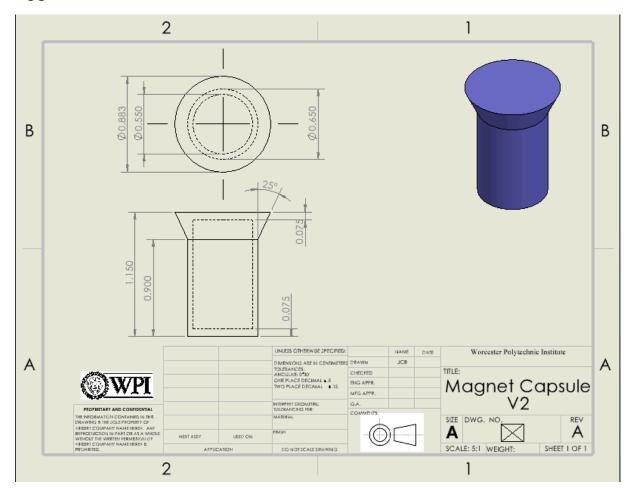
CAD Drawing schematic for the final design of the magnet capsules.
